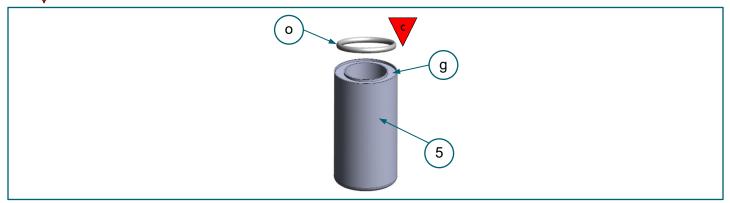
(5) HP fuel filter bowl, (o) O-ring, (g) groove
